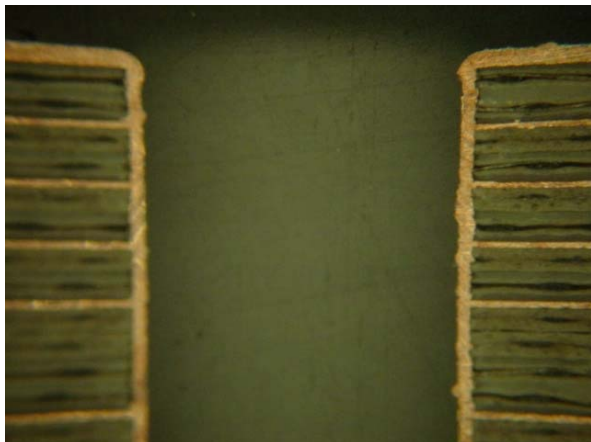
Multilayer board made with TSM-30 and TacLam TPG-32
